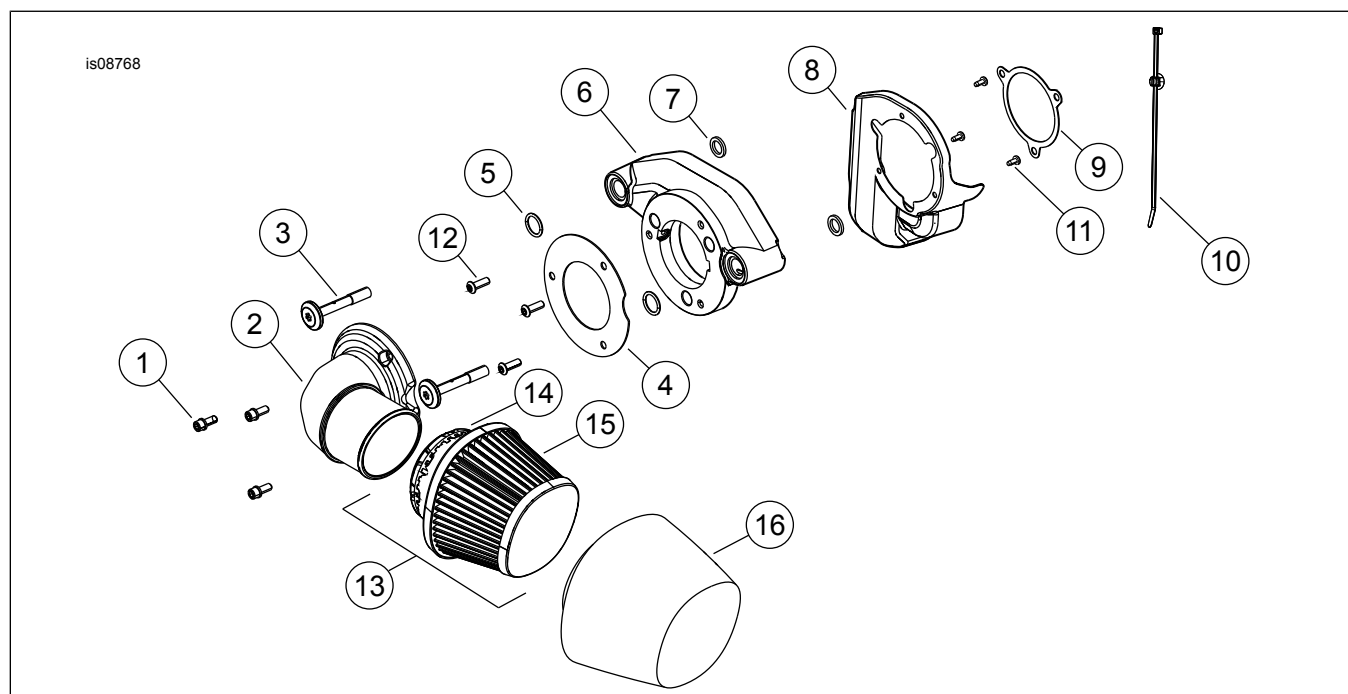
Service Parts: Screamin' Eagle Performance Air Cleaner Kit
